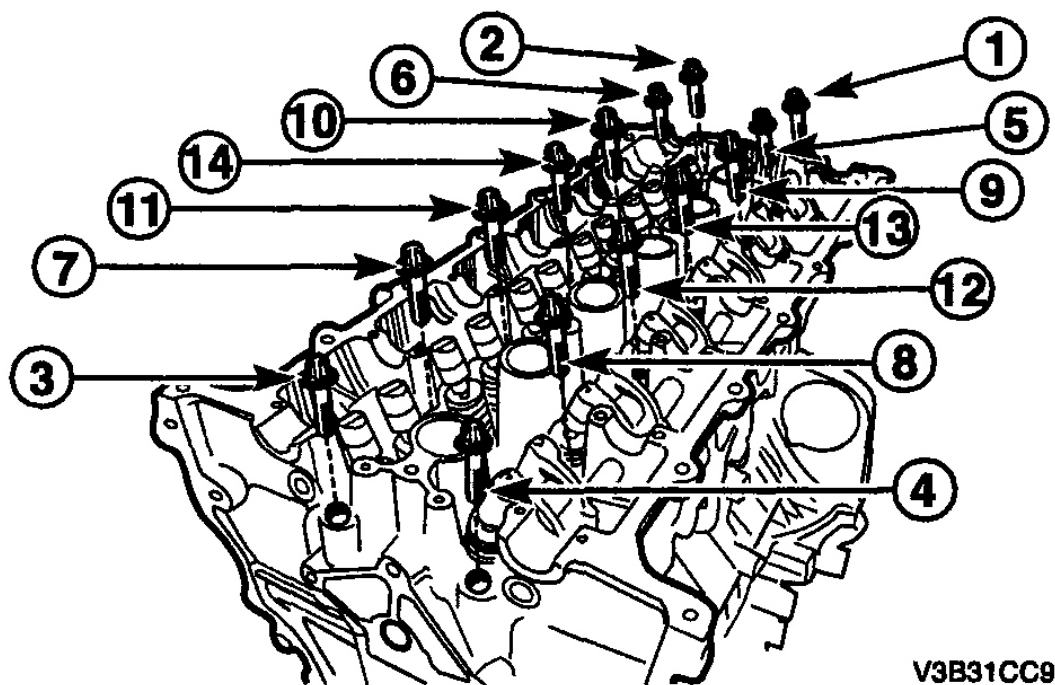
Identifying Cylinder Head Bolts Removing Sequence
